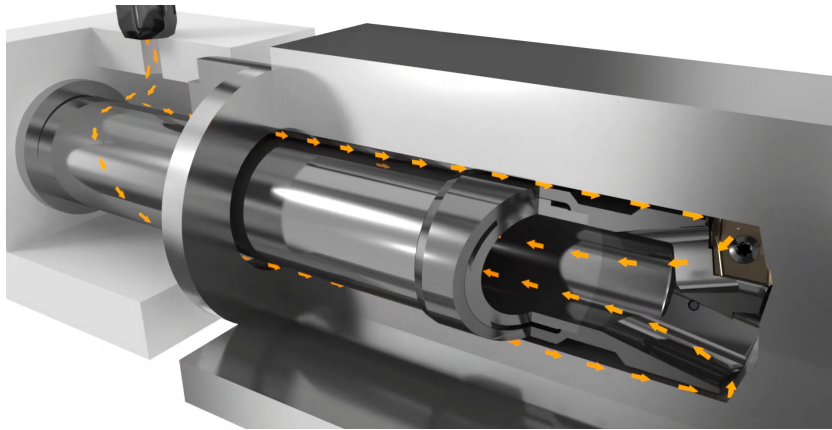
Oil flow in a BTA drilling head (botek Präzisionsbohrtechnik GmbH, 2023)
